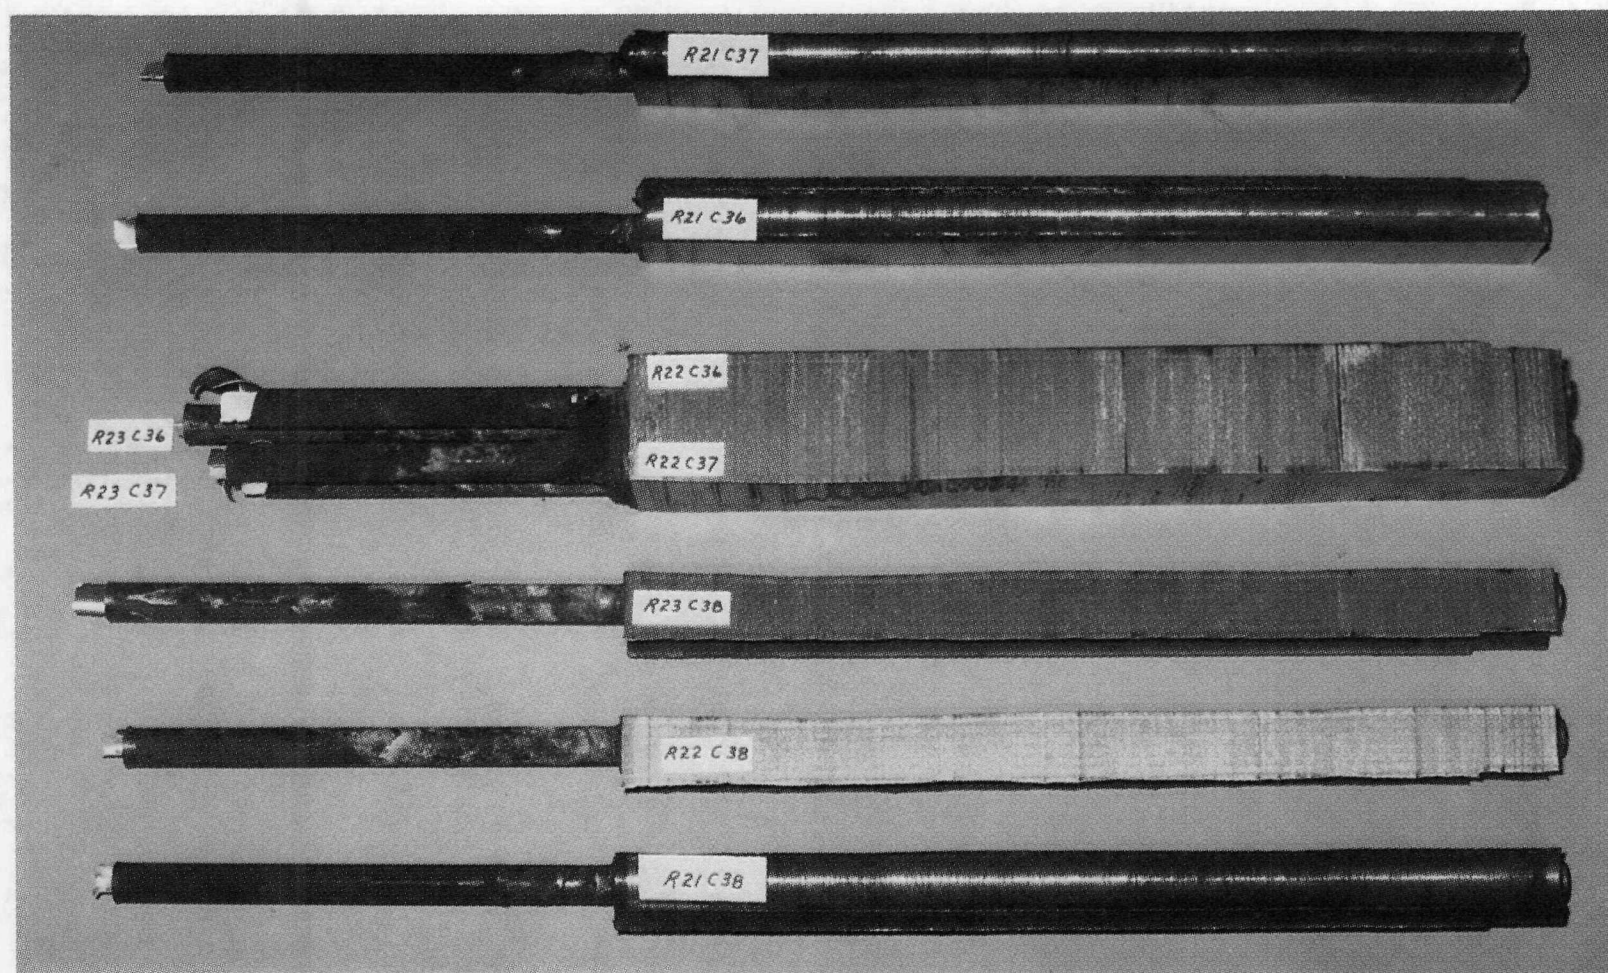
Tube Sheet Specimen 355 After Sectioning
